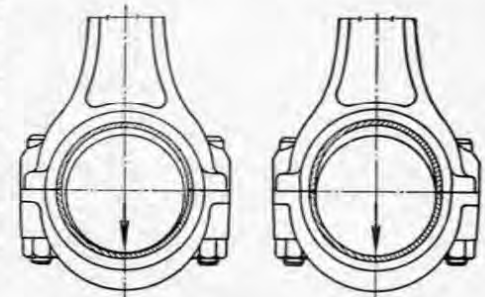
Distortion of the connecting rod due to the accelerating forces of the piston. The left hand picture illustrates the shape of the connecting rod at low speed, the right hand one shows the deformation of the big end bearing due to large accelerating forces at high speeds.
